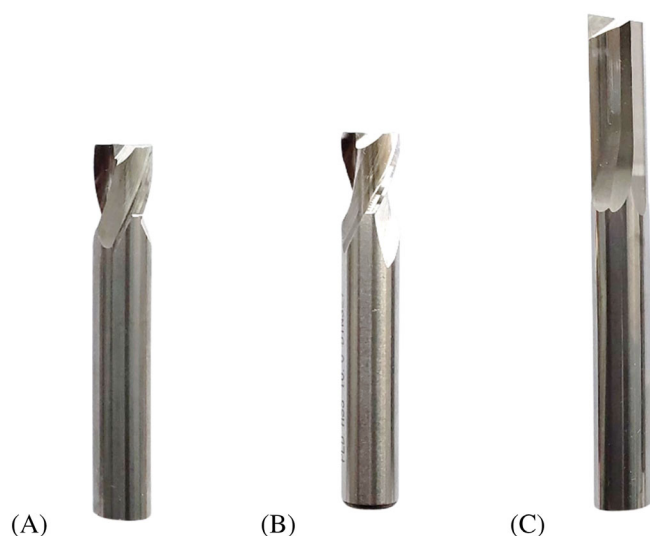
(A) Helical carbide, (B) helical high-speed steel, and (C) straight carbide tools used in the milling of composites.
